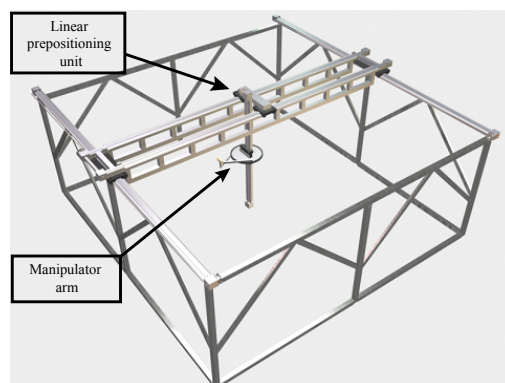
CAD drawing of the complete setup with linear prepositioning unit and manipulator arm.
